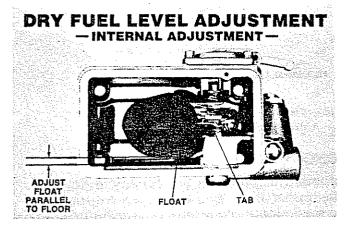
DRY ADJUSTMENT — INTERNALLY ADJUSTED FLOAT
